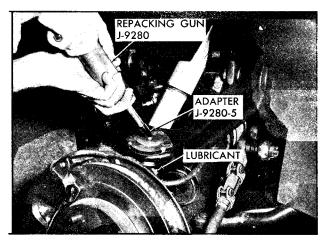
Repacking Upper Spherical Joint (Eldorado)
